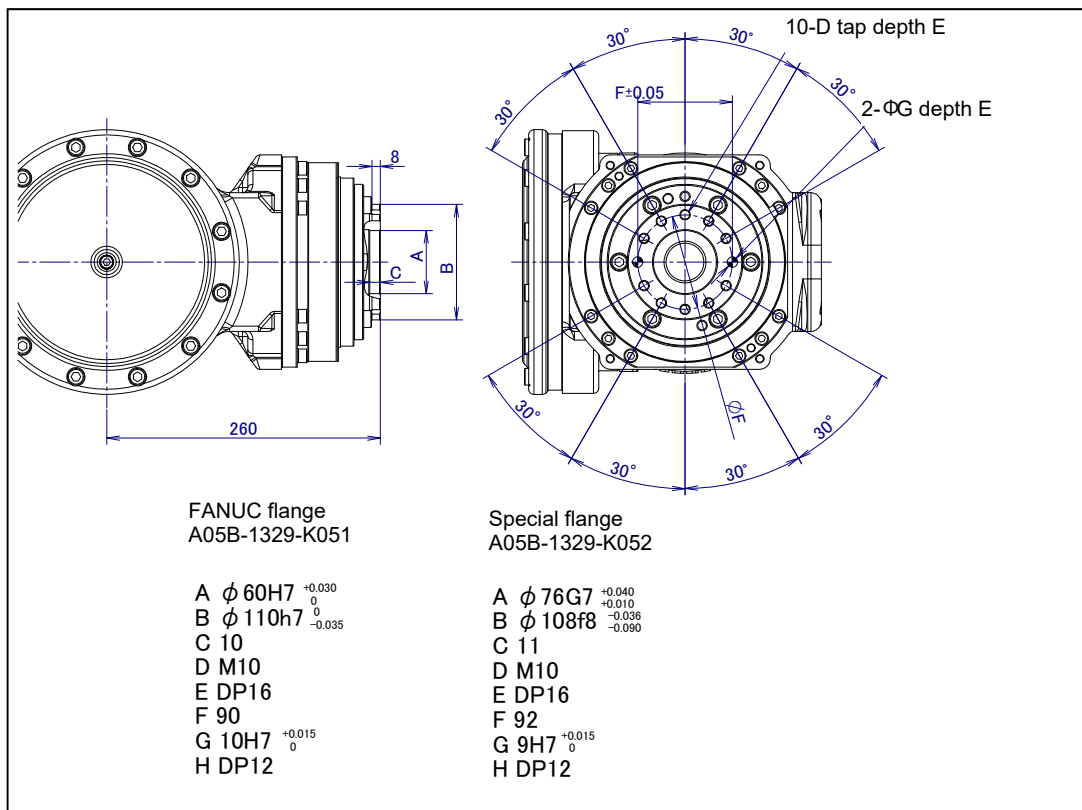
(g) End effector mounting face (FANUC/Special flange) (R-2000iB/210F/200R)
